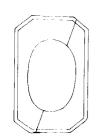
A separate base part which has left its own mould seam on the heel of the bottle. Separate base parts do not always have commercial markings.
